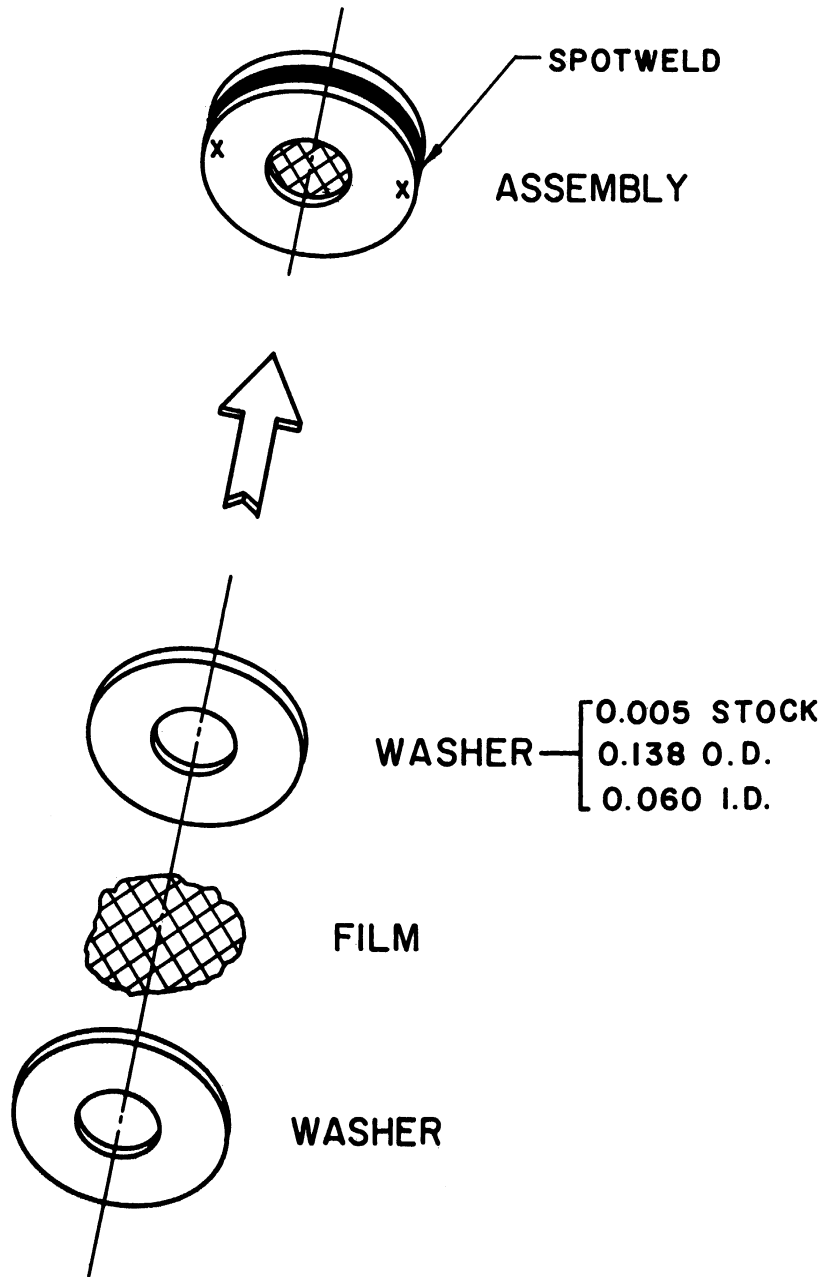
Sketch Showing the Assembly of the Specimen Prior to the Third Step of the Thinning Procedure.
